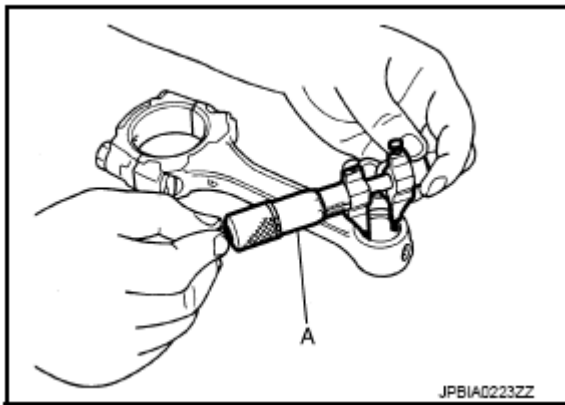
Measuring Inner Diameter Of Connecting Rod Bushing Using Inside Micrometer
